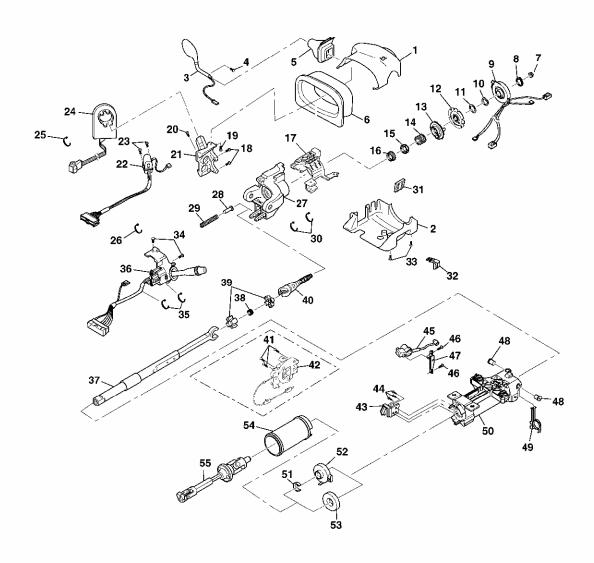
Steering Column Disassembled View Courtesy of GENERAL MOTORS CORP.
